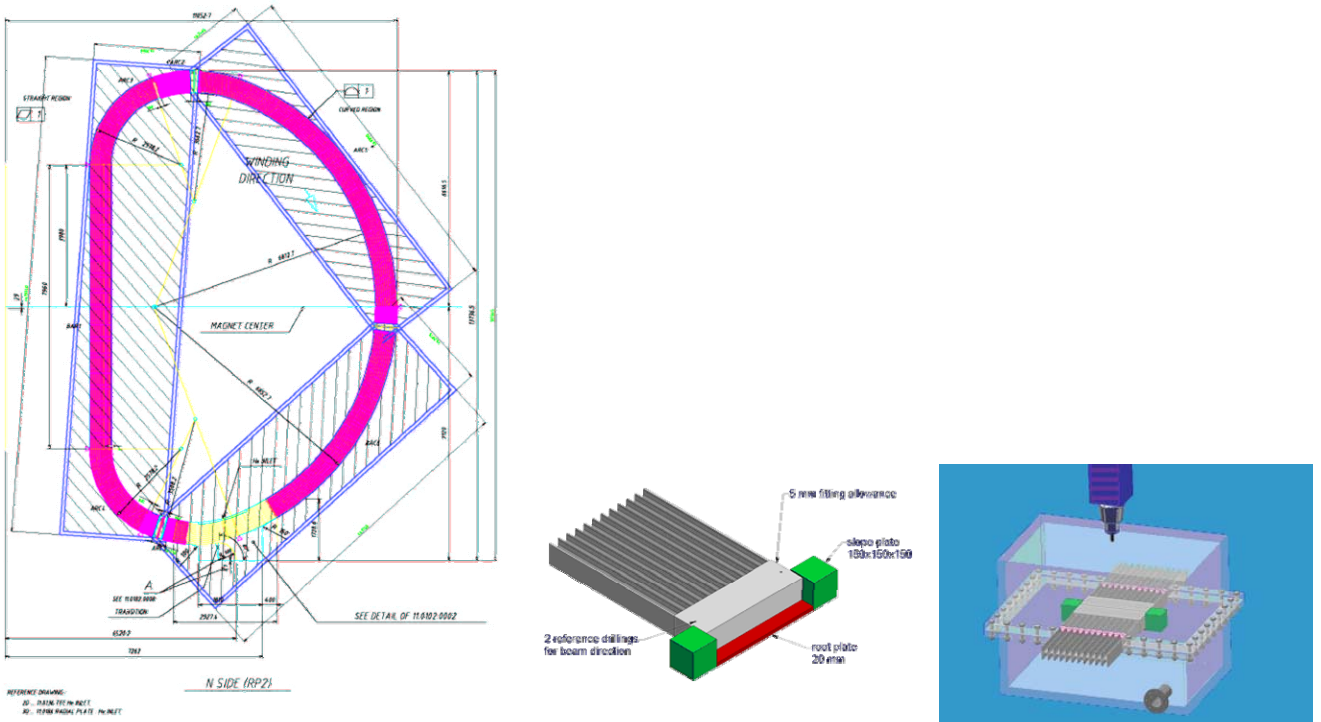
Concept 1: Pre-machining of segments with grooves, EBW of the segments and final machining of the RP
